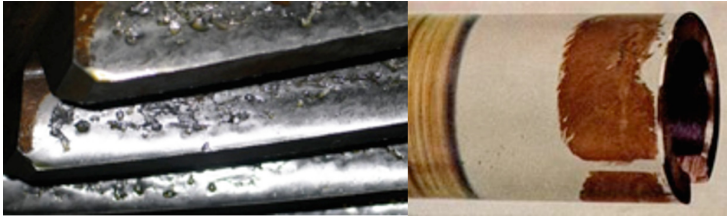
A typical kind of surface chipping (pitting) and fretting corrosion
